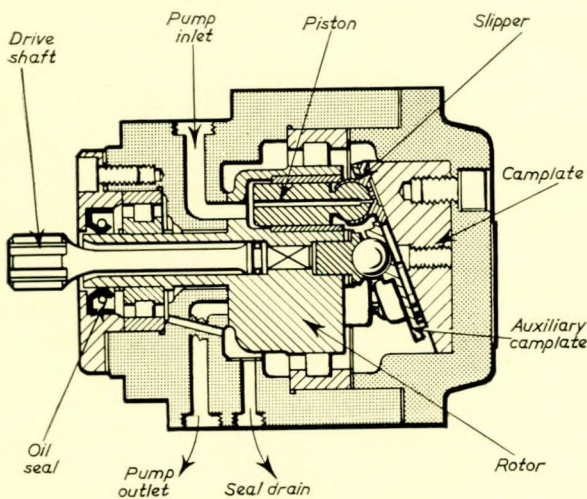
F.I.P.60 hydraulic pump (schematic arrangement)
